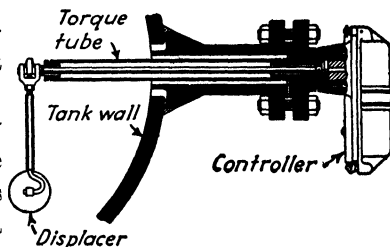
Torque tube seals displacer chamber. (Courtesy of Fisher Governor Co.)
